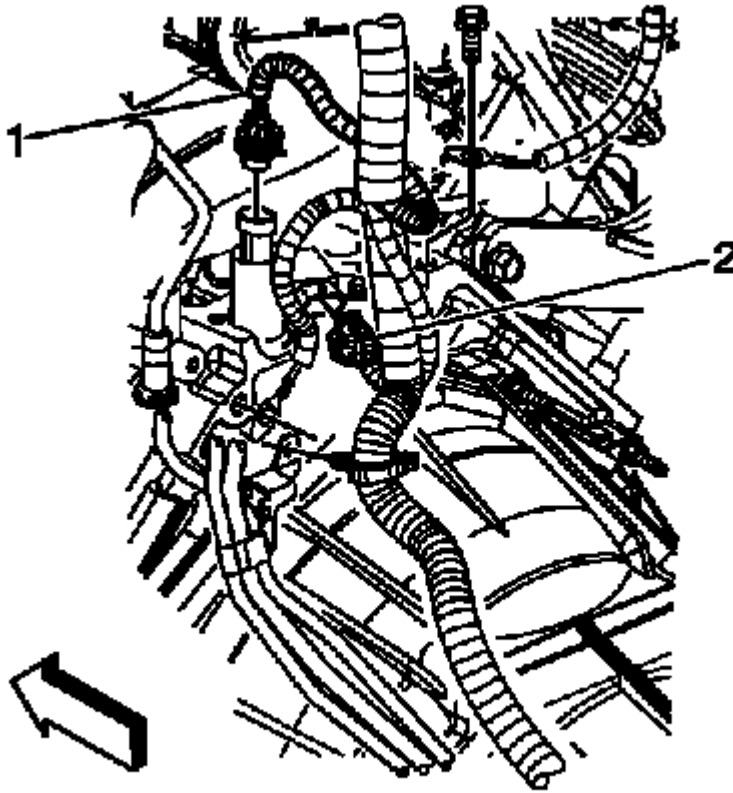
View Of Oil Pressure Sensor & CMP Sensor Connectors
